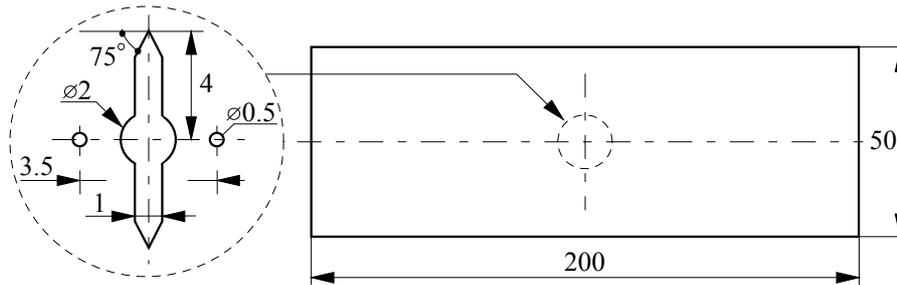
Geometry of the M(T) specimen used in this work (dimensions in mm).
